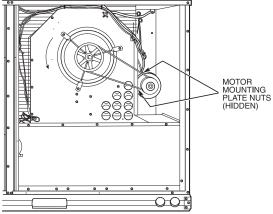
Typical Belt-Drive Motor Mounting for Size 008
